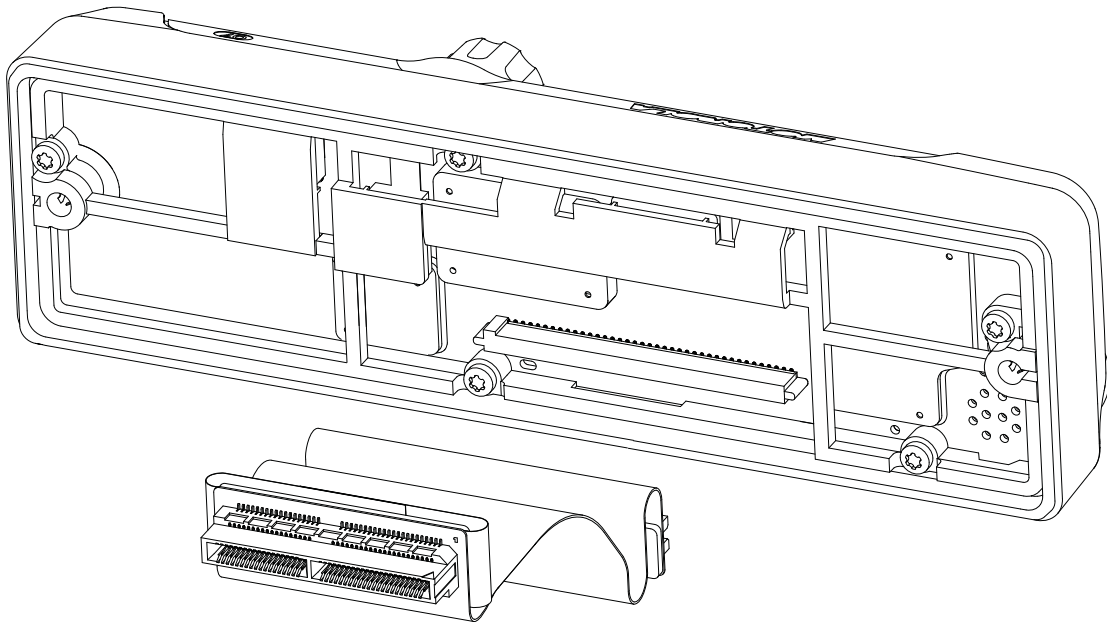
Installing the Transceiver Flex onto the Control Head
